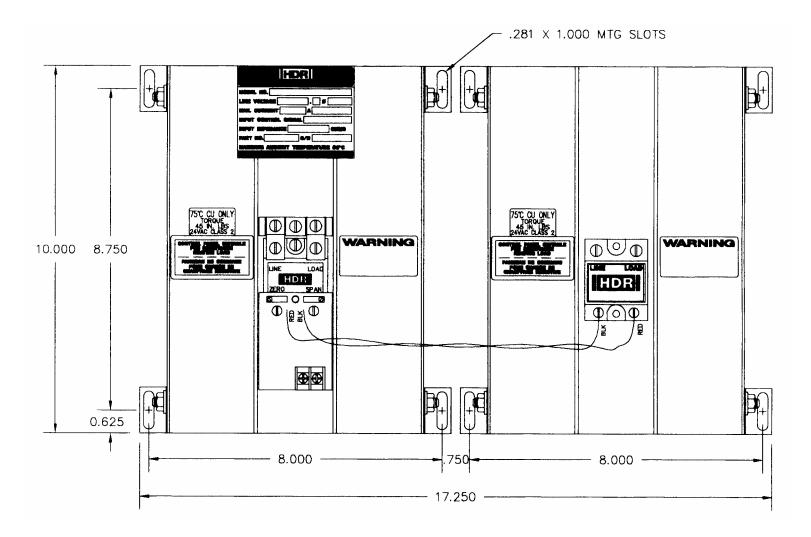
OUTLINE and MOUNTING DIMENSIONS ZF3 – 15, 25 & 40A
